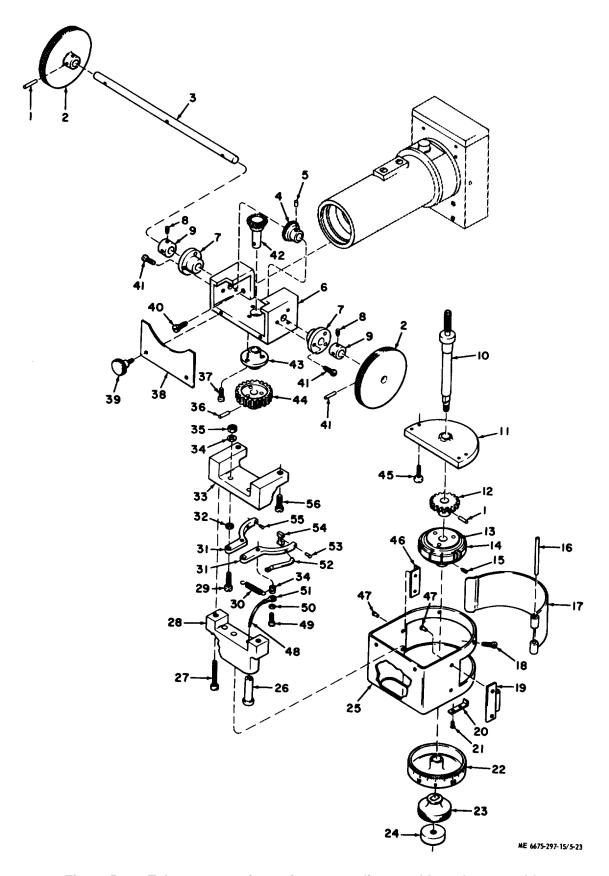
Telescope eyepiece micrometer, disassembly and reassembly.
